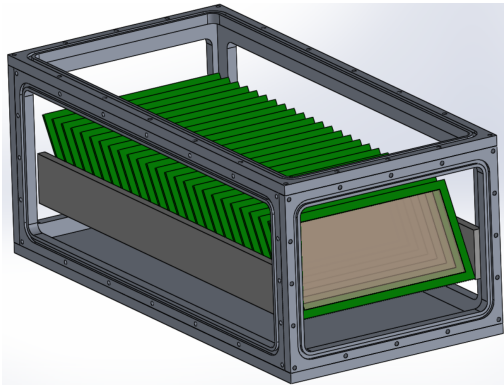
Isometric view of the CAD assembly of TEGIC chamber with electrodes.
